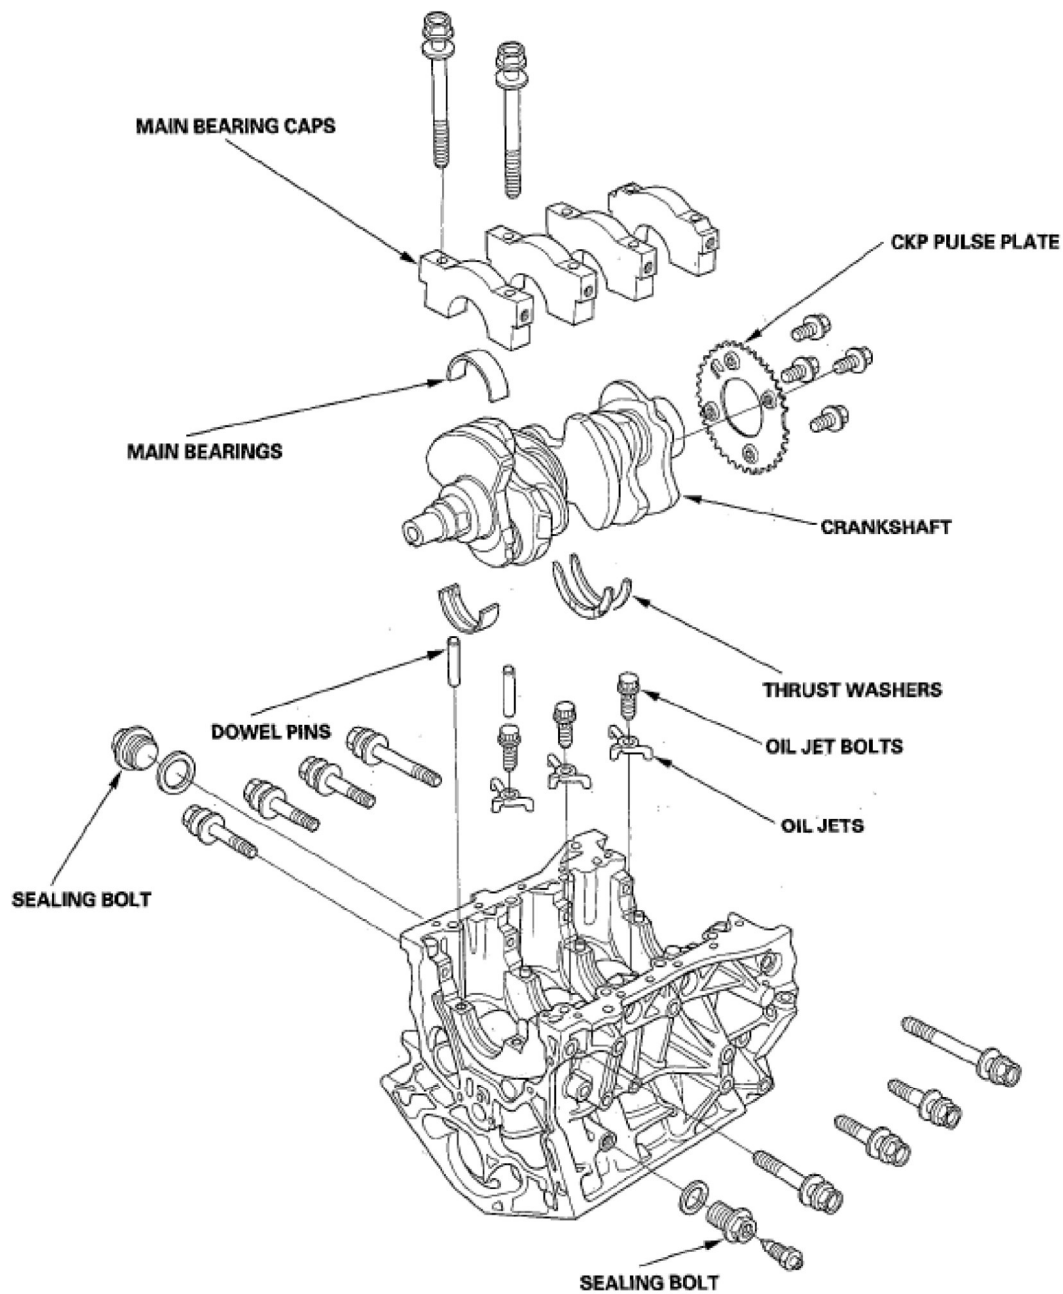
Identifying Engine Block Component Location - '08-09 models J35A7 Engine
